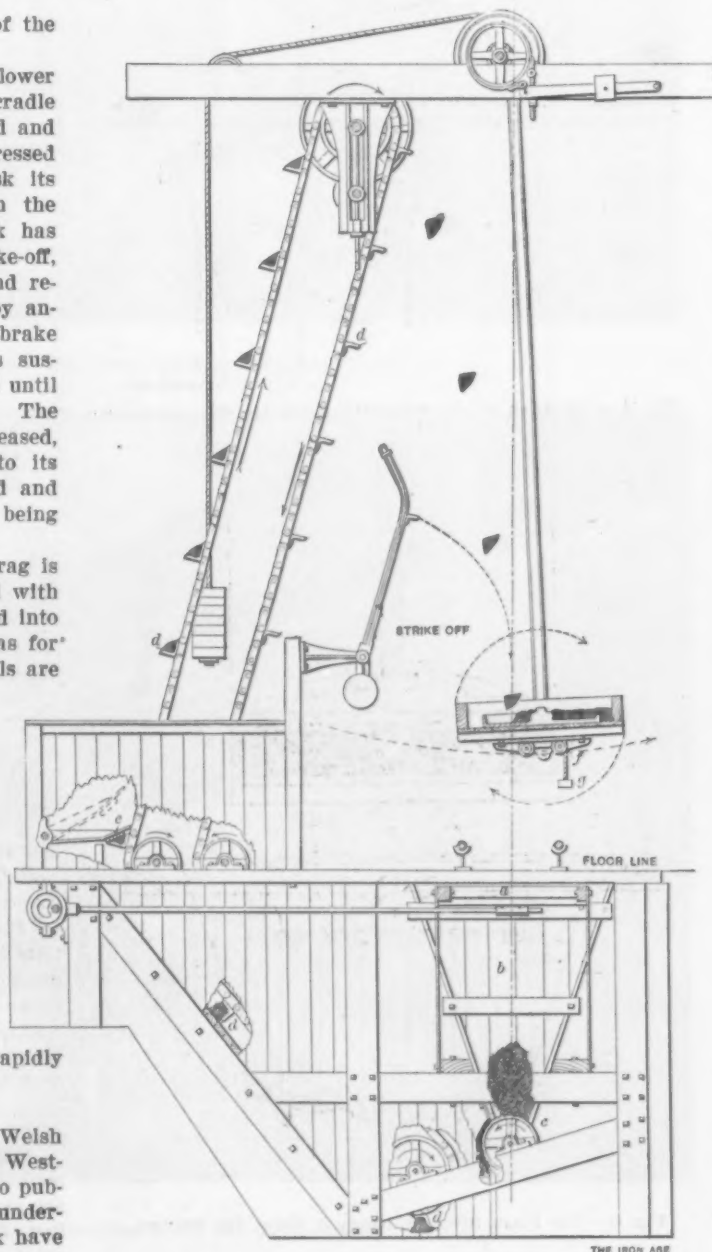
Side Elevation of the Gravity Molding Machine.
